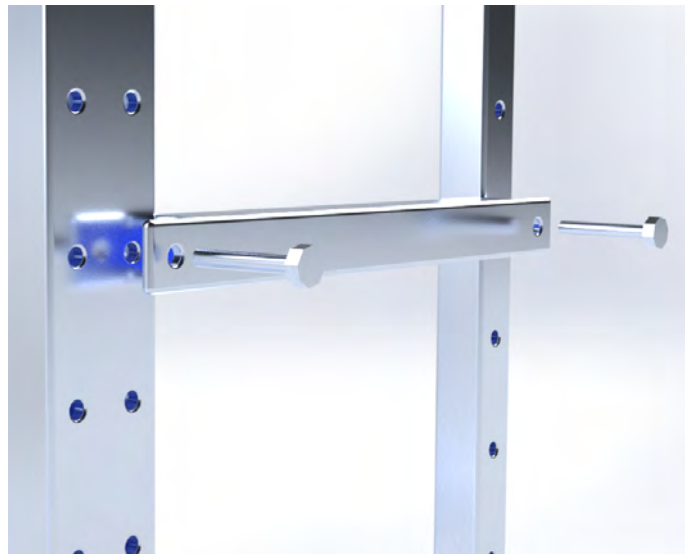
Close-up Exploded View of Connection Points for Horizontal Members in Bolted Design
